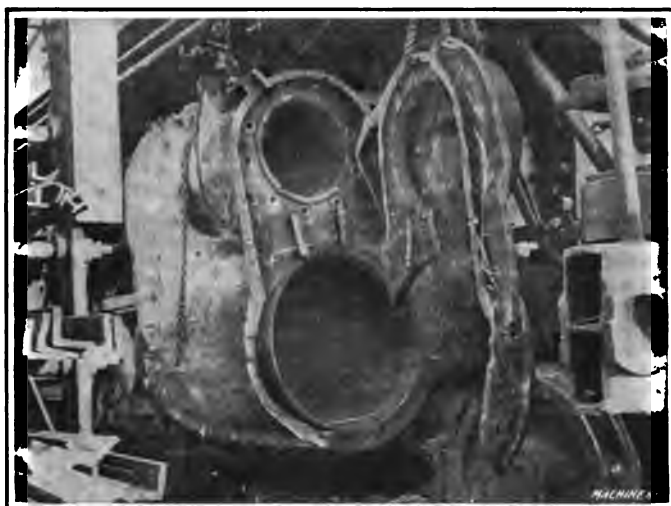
Steel Casting to which Bolt Lug was electrically welded, as shown to the Left
